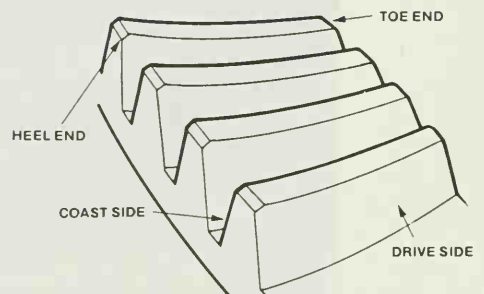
Parts of a ring gear tooth. (Nissan Motor Corporation in USA)
